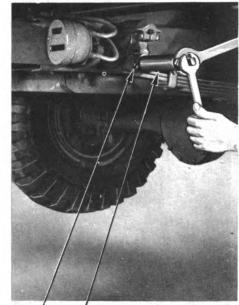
Removing Rear Spring Shackle Bolt with Puller 41-P-2951-70
